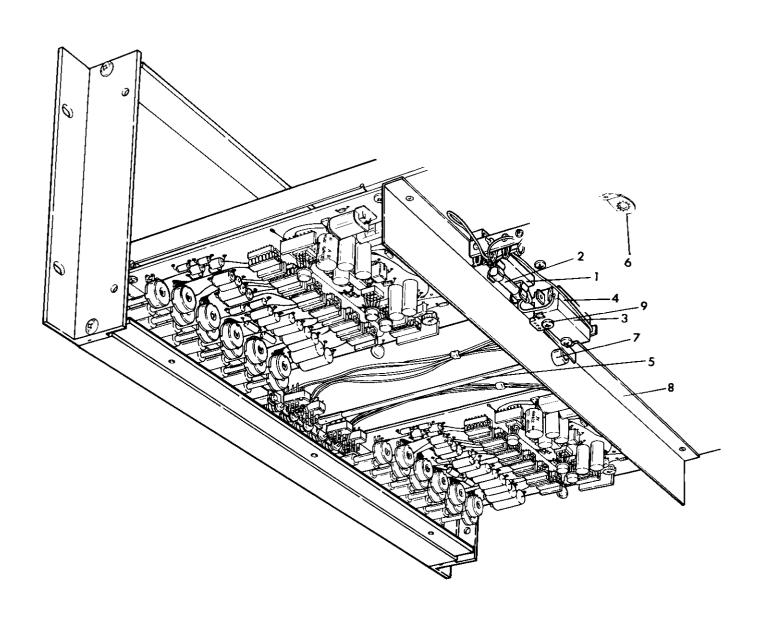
3/4 Rear View Inside Bottom Chassis
